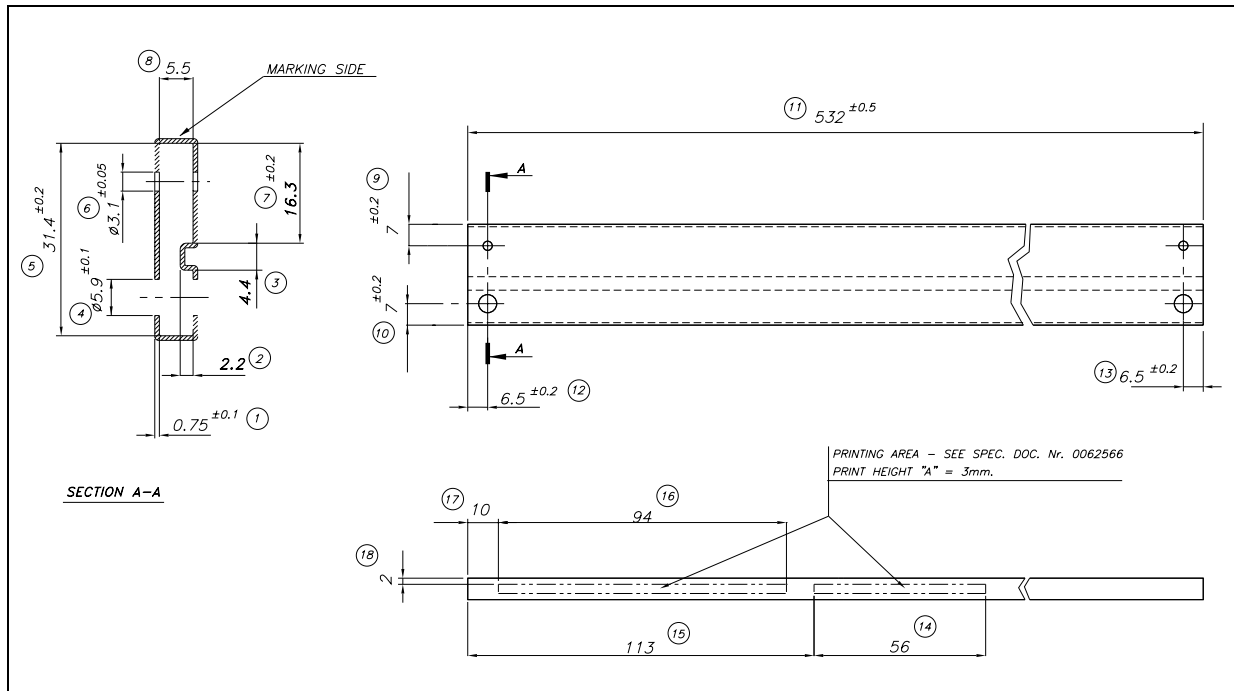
Drawing dimension tube for TO-220 Single Gauge (mm.)
